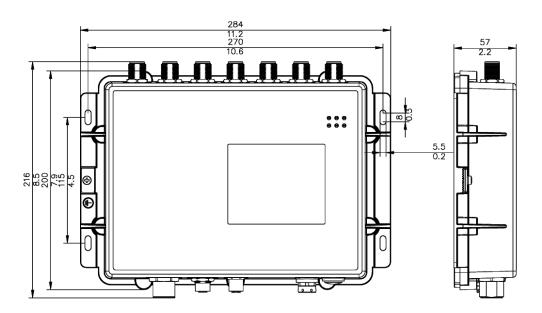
DAP847 dimensional measurements (unit:  $\frac{mm}{inch}$ )
